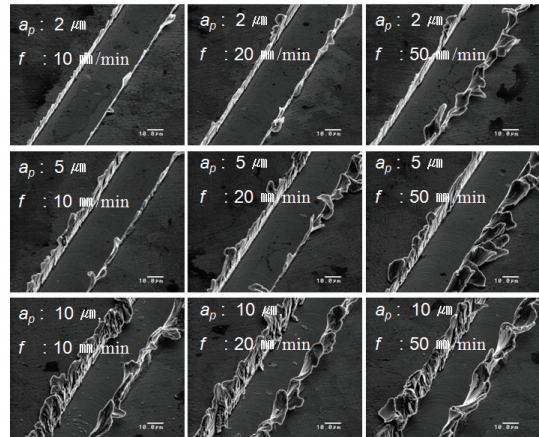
The machined surface using a Ø 30 µm end-mill with various cutting conditions
